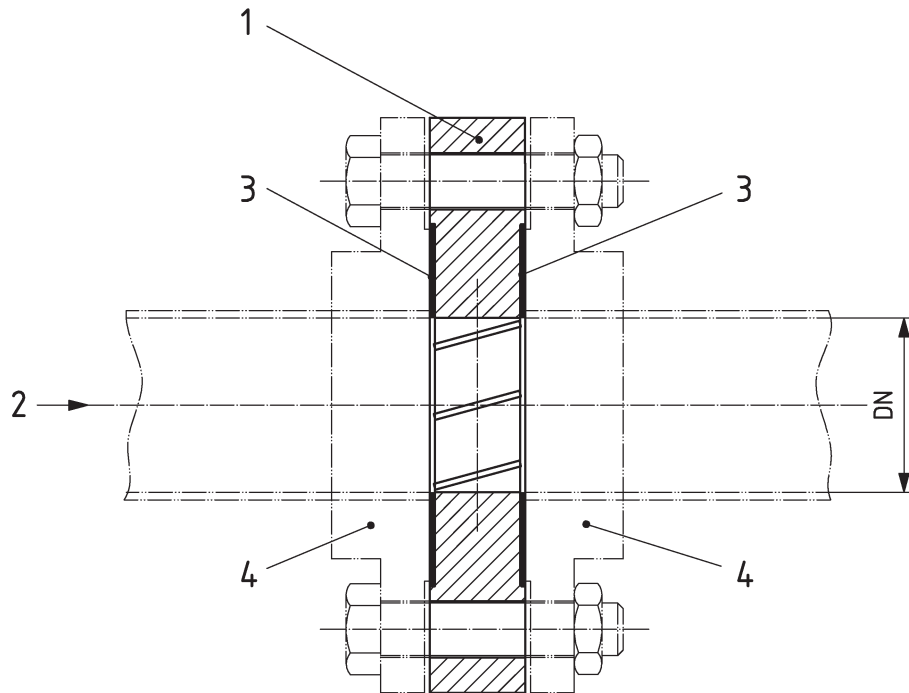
Gasket for a threaded type disturbance generator, with dimensions as set out in [Table B.5](#)
